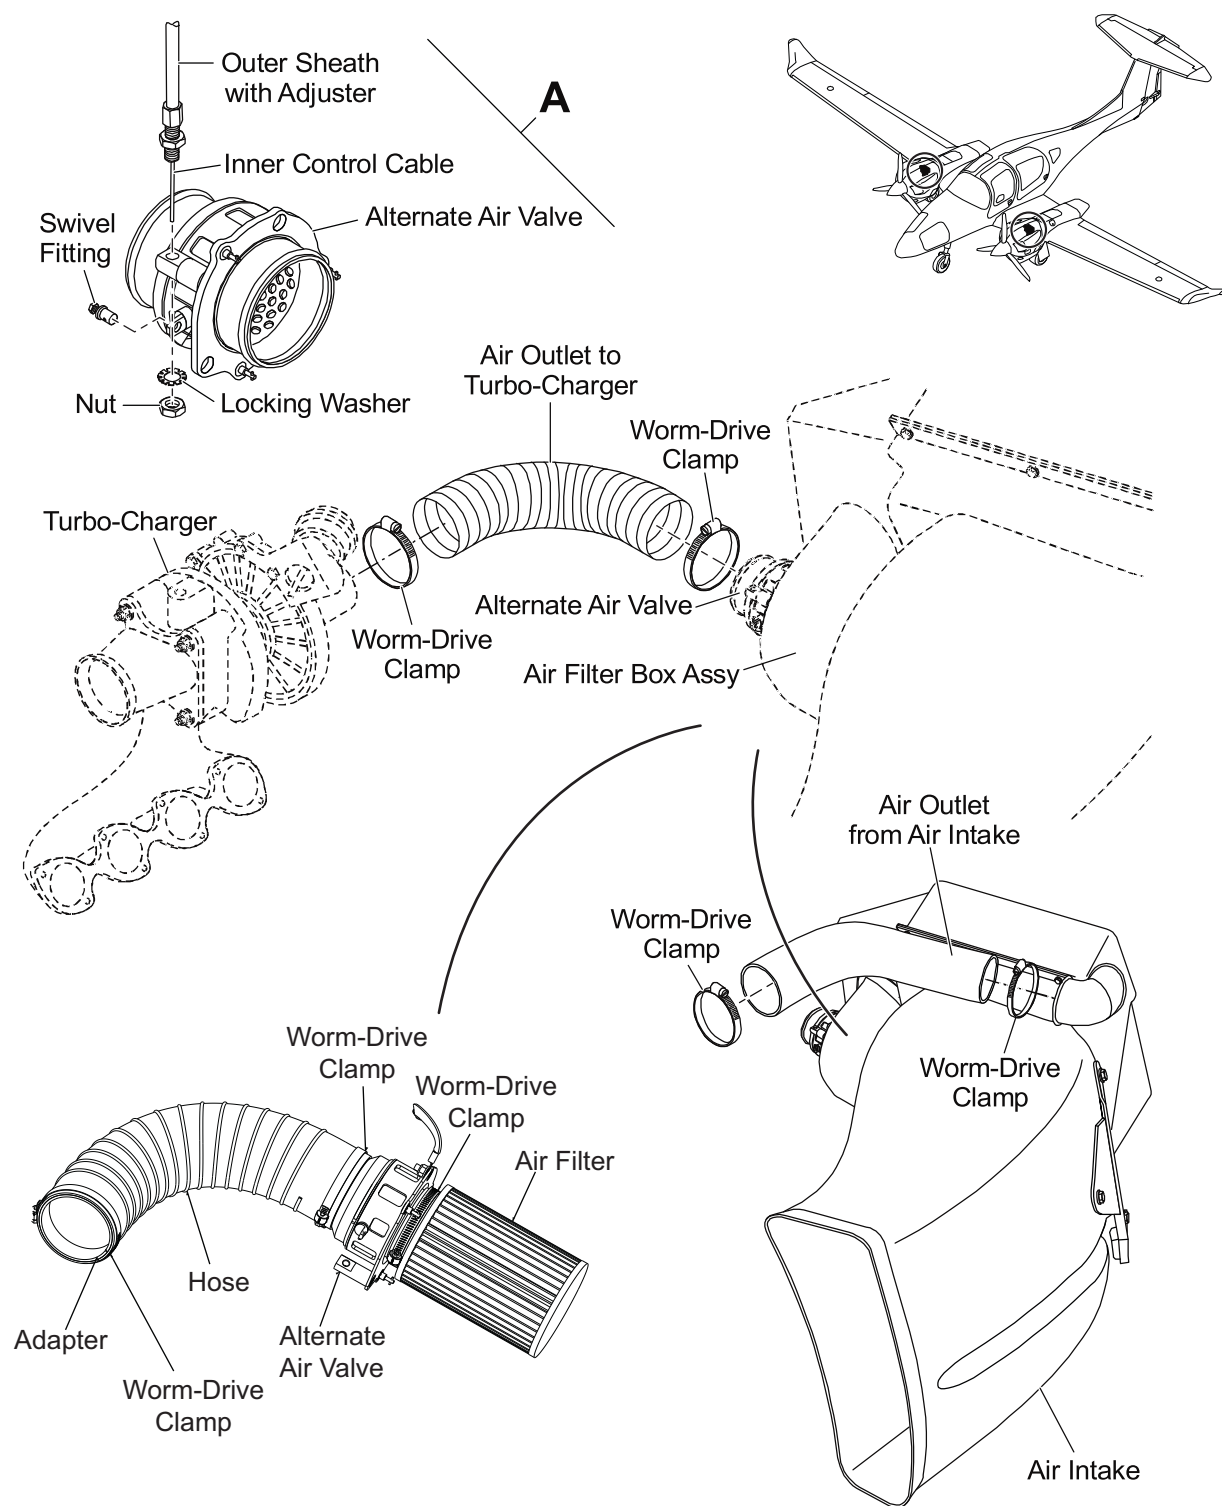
Air Filter and Alternate Air-Valve Assembly
